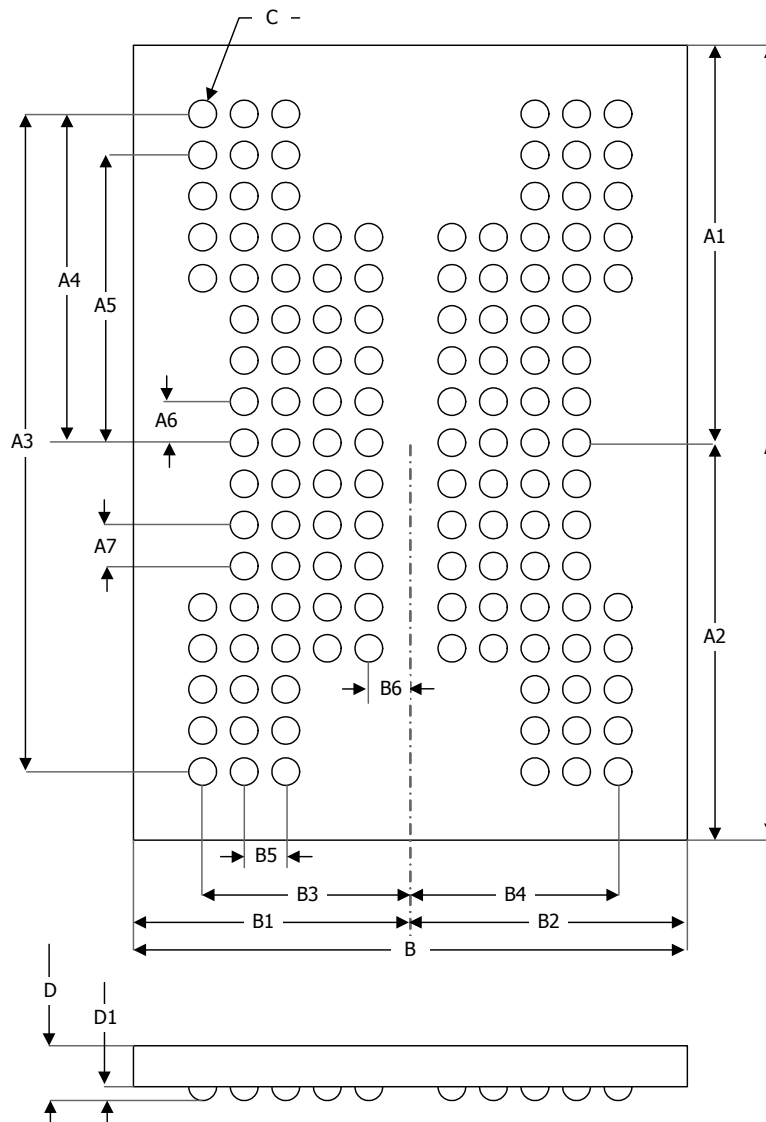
defines the ball spacing requirements for the 132-ball BGA package. The solder ball diameter is 0.55mm post reflow. The 132-ball BGA has one package size : 12mm x 18mm.
